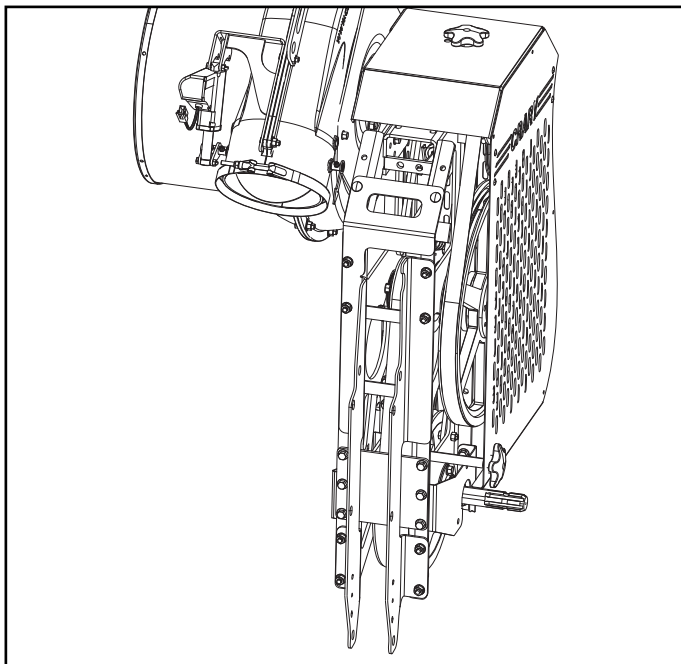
LH & RH mount brackets attached to Belt Drive Assembly, from front left side
